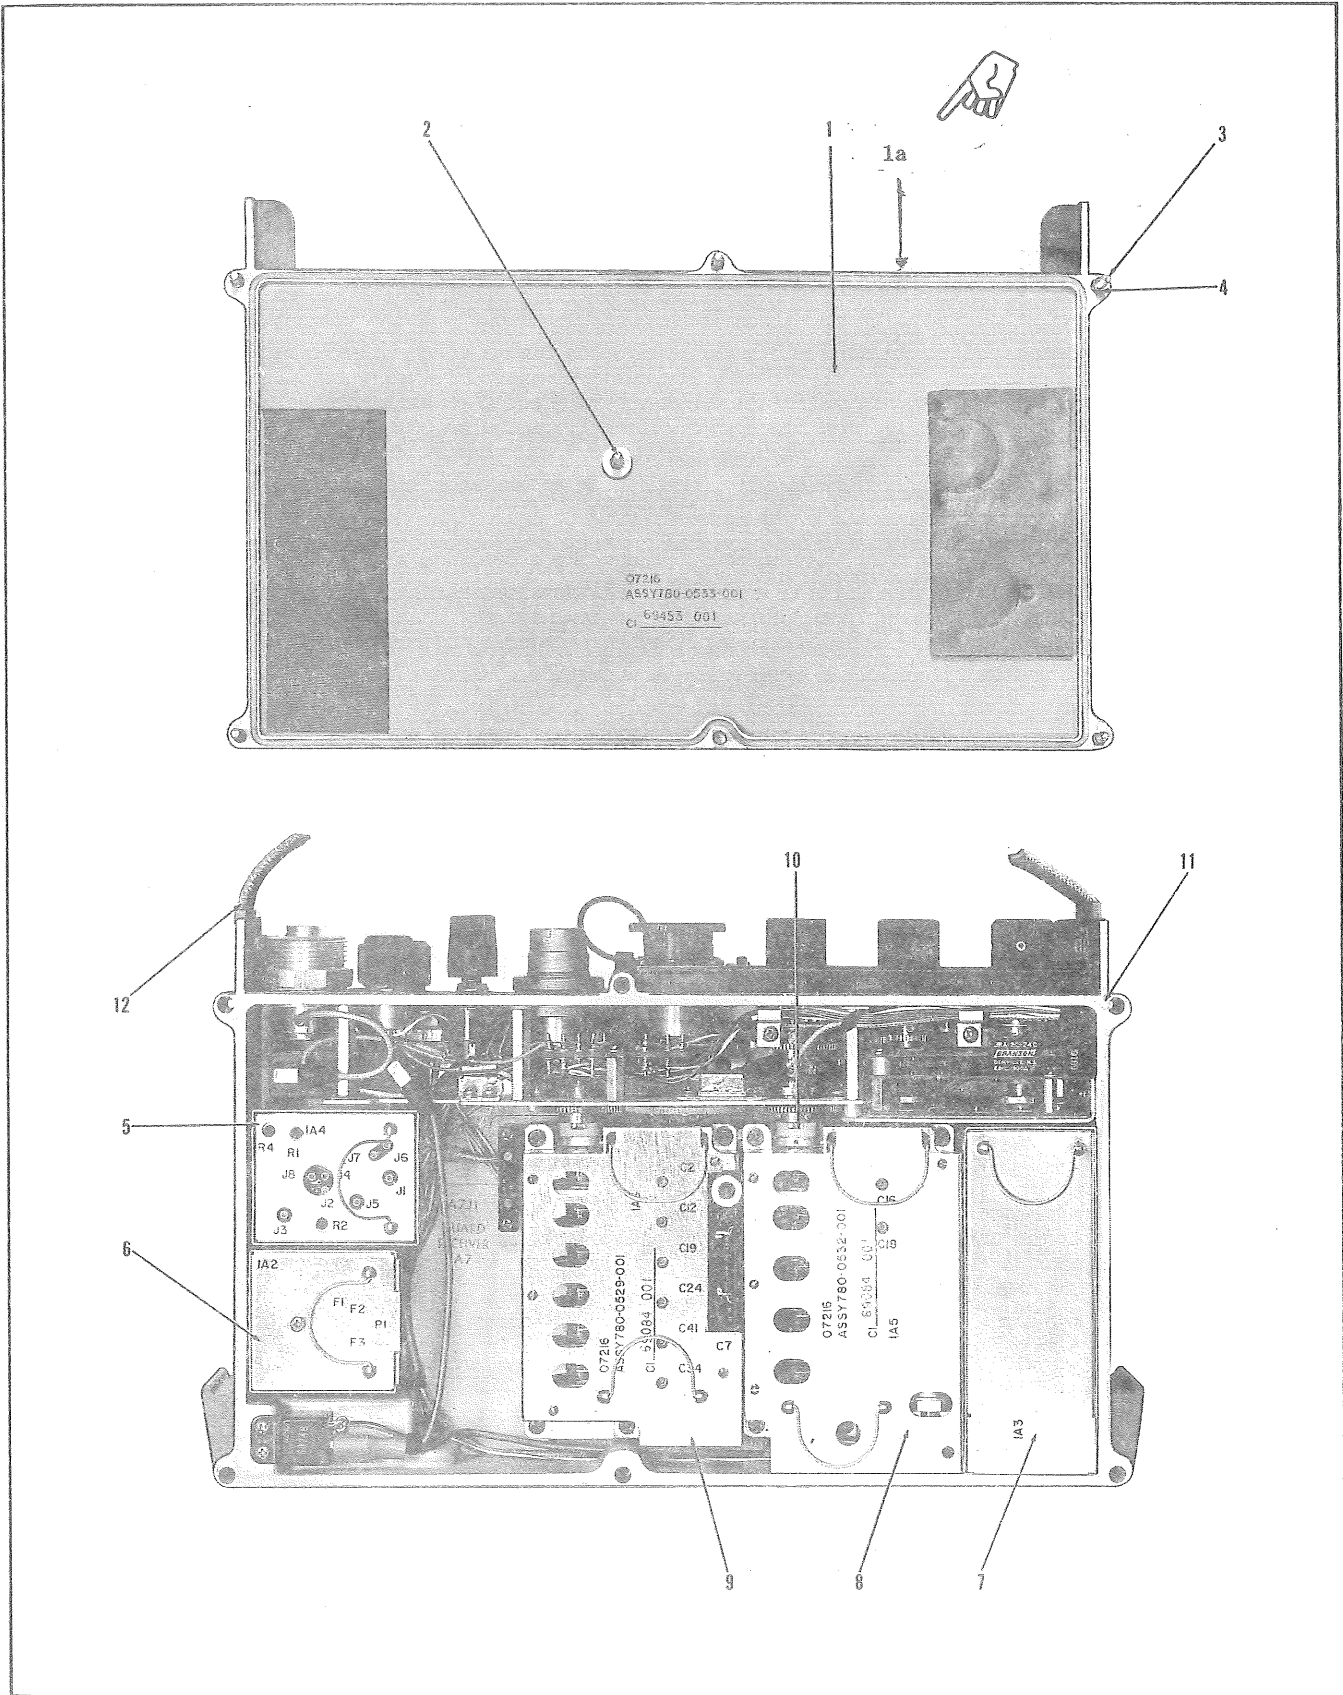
Receiver-Transmitter RT-865D/PRC-66
